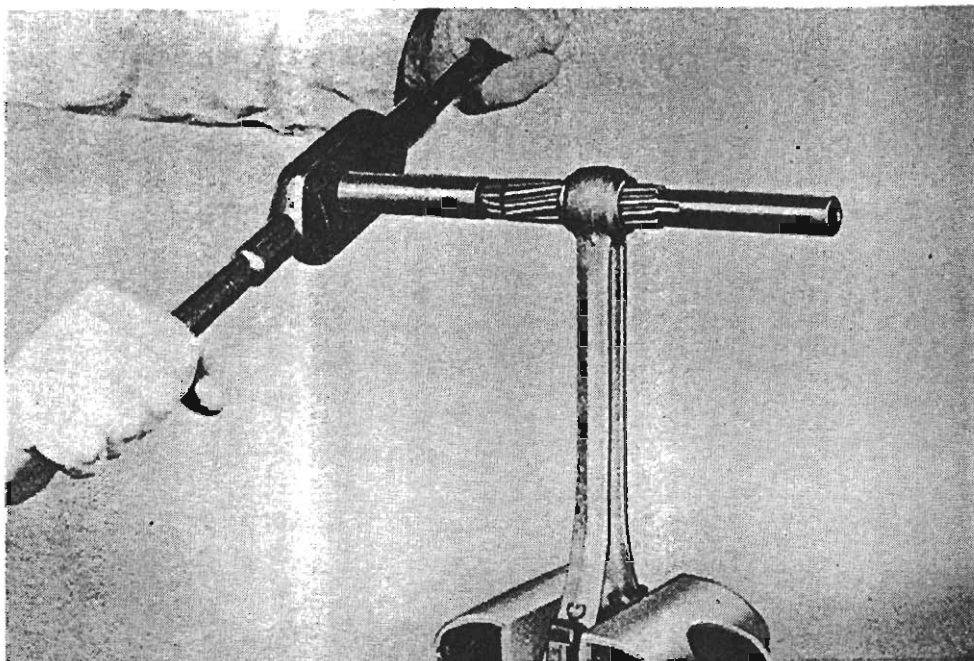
Piston Pin Bushings May Be Reamed to the Proper Size Using the Reamer J-874-18.
